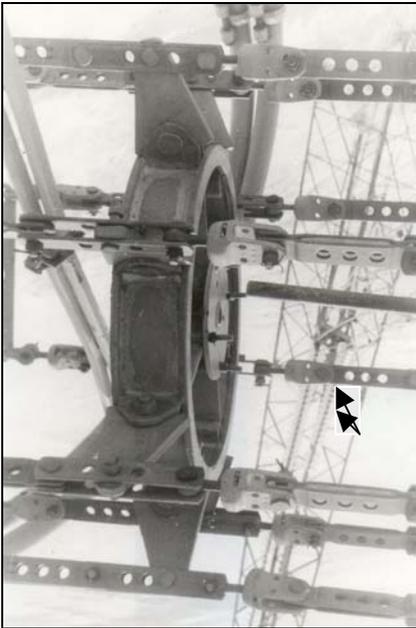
A radial yoke of 8KL-16-2 type mounted on links of PRR type of a tension insulator set. Fracture places are indicated with pointers.
